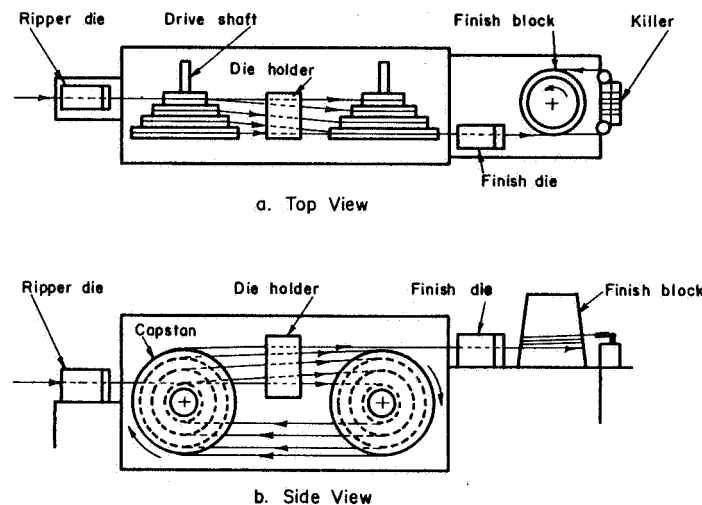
SCHEMATIC DRAWING OF WET-WIRE-DRAWING MACHINE (REF. 30)
